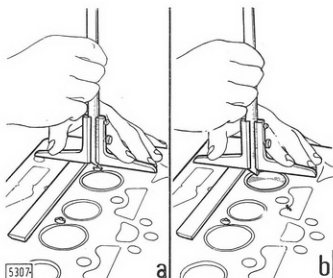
Checking Fuel Injector Protrusion (a) and Valve Depth in Cylinder Head
